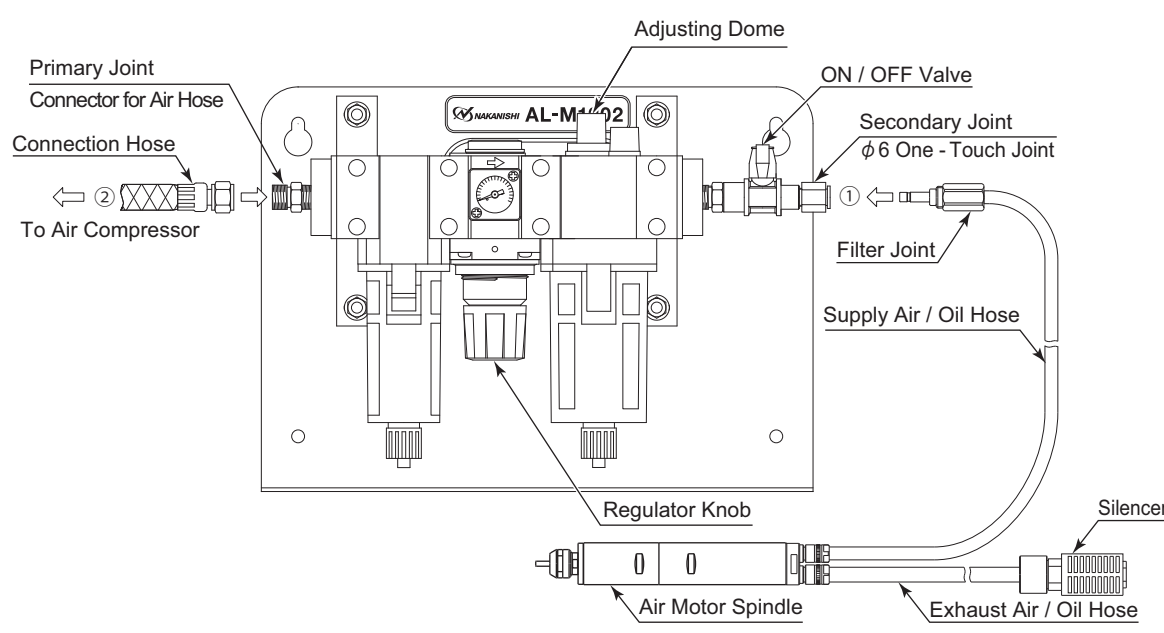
Connection of Air Line Kit " AL - M1202 (Sold Separately) "
